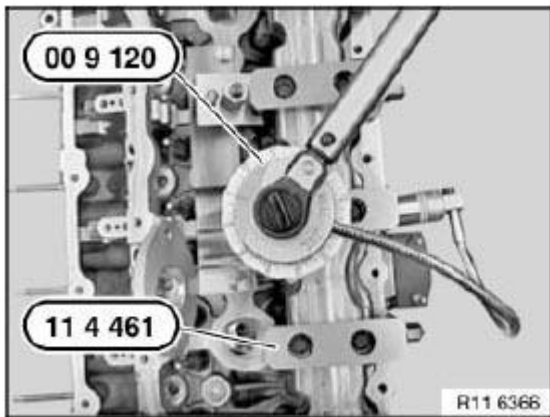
Special Tools (11 4 461) And (00 9 120)
